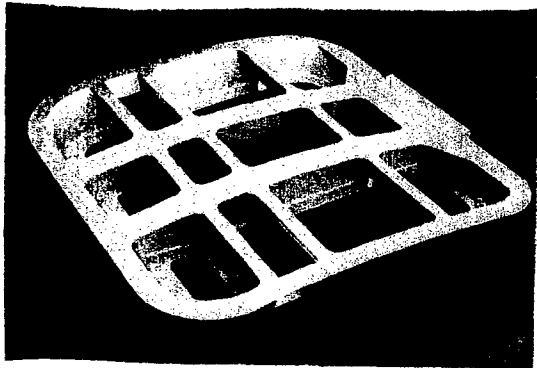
Exit Door Manufactured by Casting for Trial (Material: A357)
